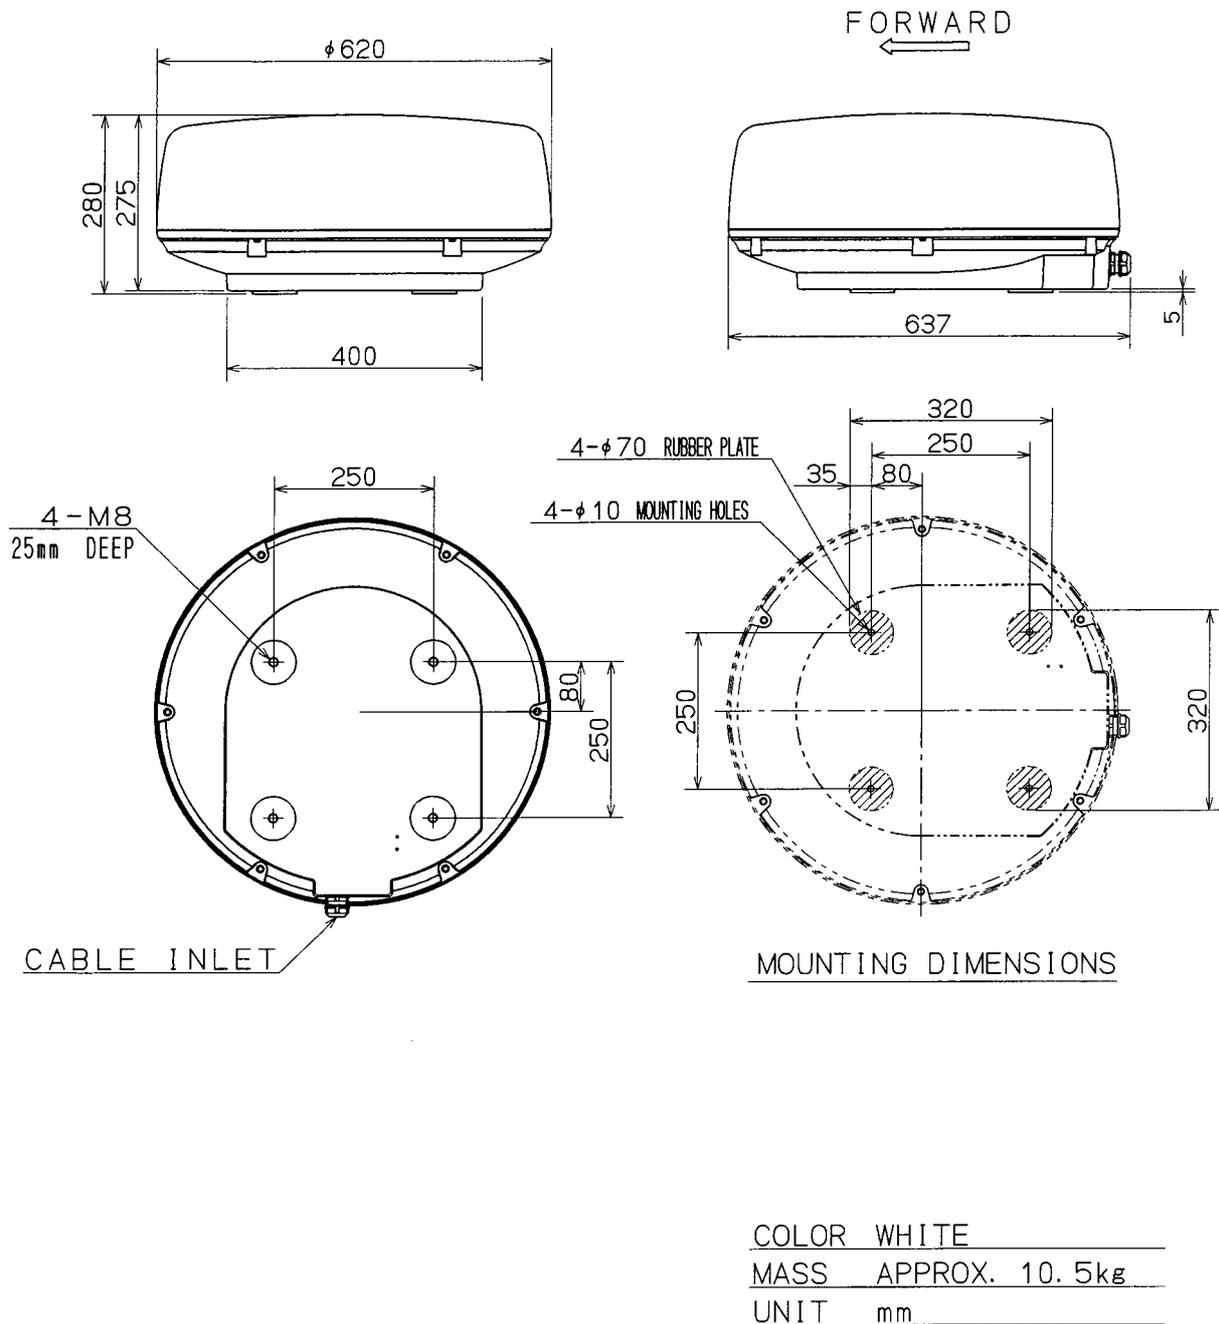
OUTLINE DRAWING OF SCANNER UNIT NKE-2042
